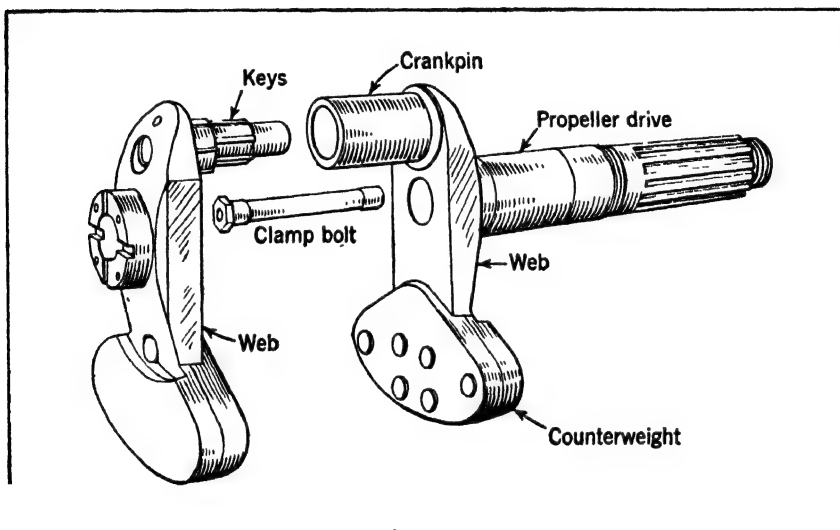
Parts Comprising the Crankshaft Assembly of Pratt & Whitney "Wasp" Motor Before they are Bolted Together. Notice the Rugged Design of the Crankpin Joint.
